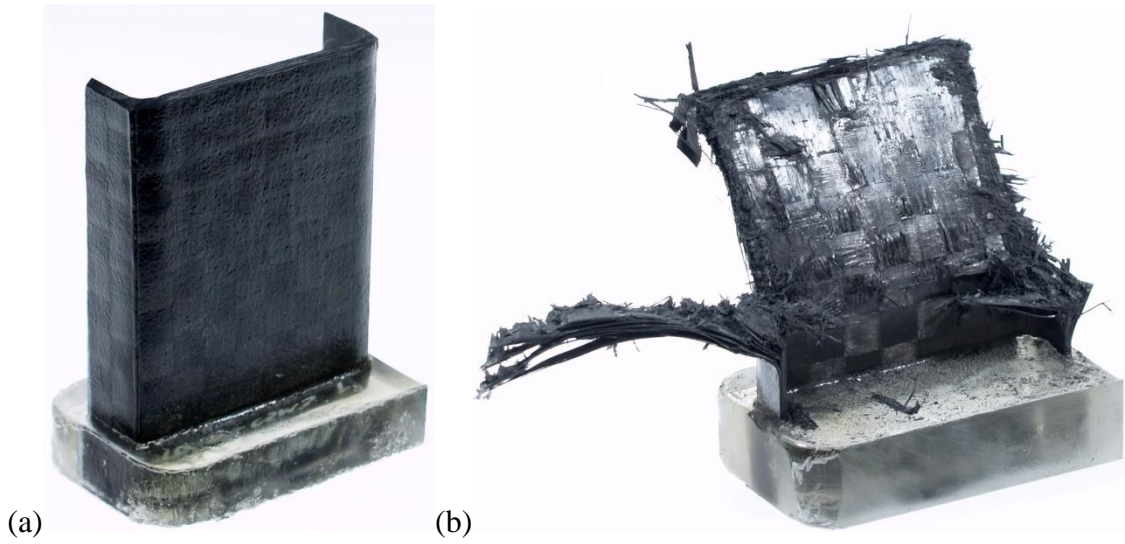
Small c-channel, specimen III, (a) before and (b) after crush testing.
